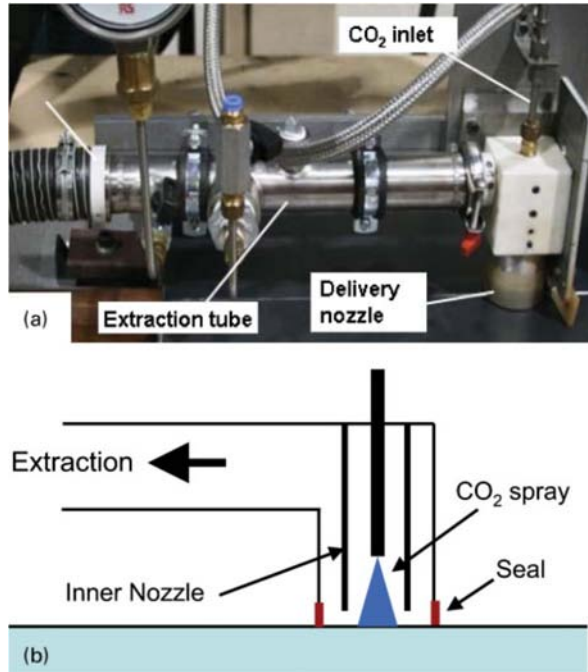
Nozzle arrangement for cryogenic cooling of the weld seam during welding, allowing continuous delivery and extraction of CO₂ spray [111].
